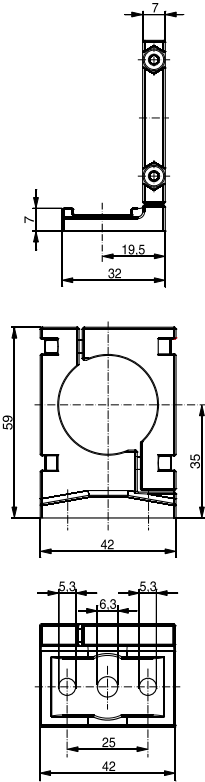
TOP AND BOTTOM MOUNTING BRACKET (REF. YXW-0001-000)
